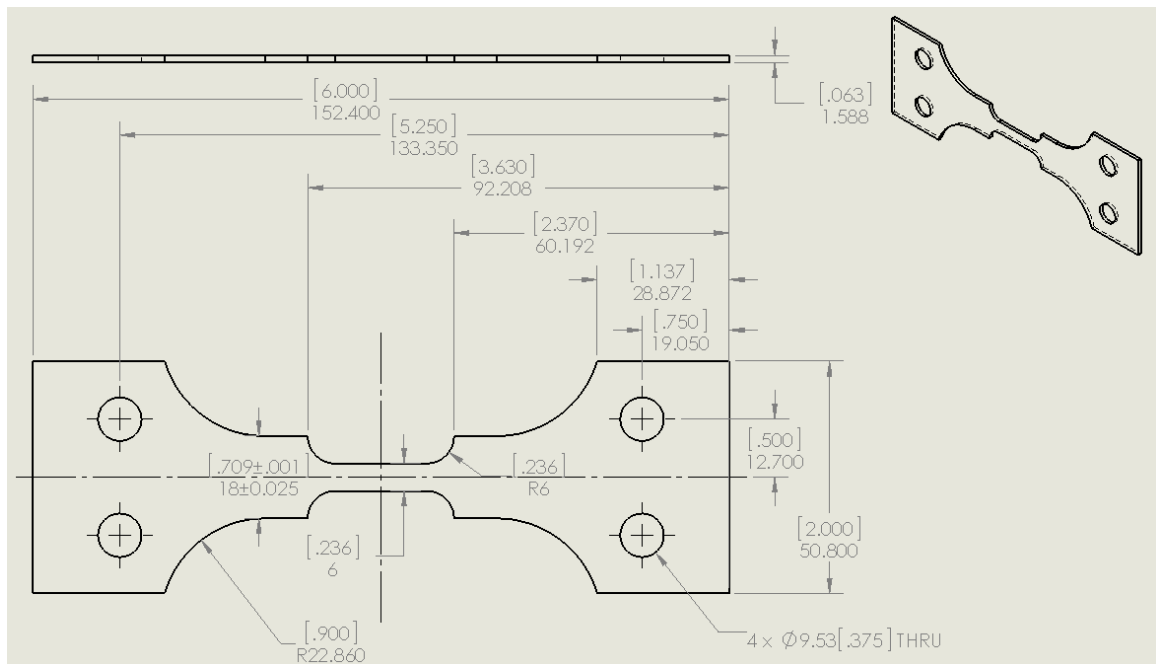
Technical drawing of the 6mm-width specimen without groove (Courtesy of James Gose and Haocheng Pan). This specimen was obtained by in-house machining of an 18mm-width specimen (without groove).
